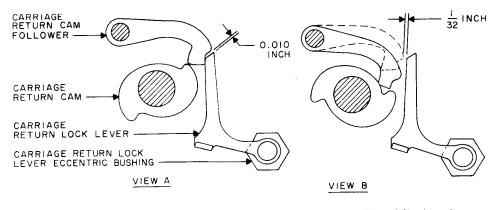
Carriage Return Lock Lever Eccentric Bushing Adjustment
